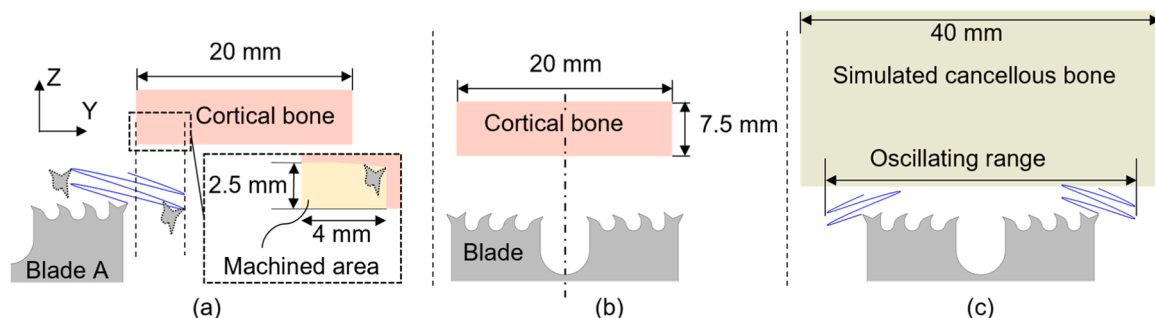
Oscillating sawing experiments. (a) Side stopped groove cut. (b) Through groove cut. (c) Stopped groove cut.
